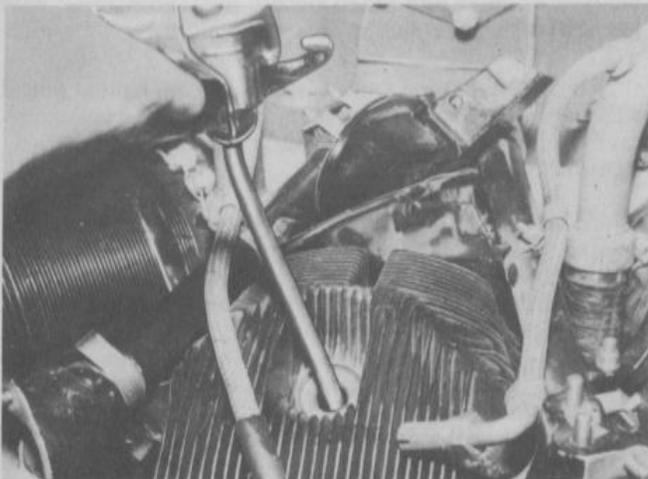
Spray Cylinder Bores Through the Spark Plug Holes
